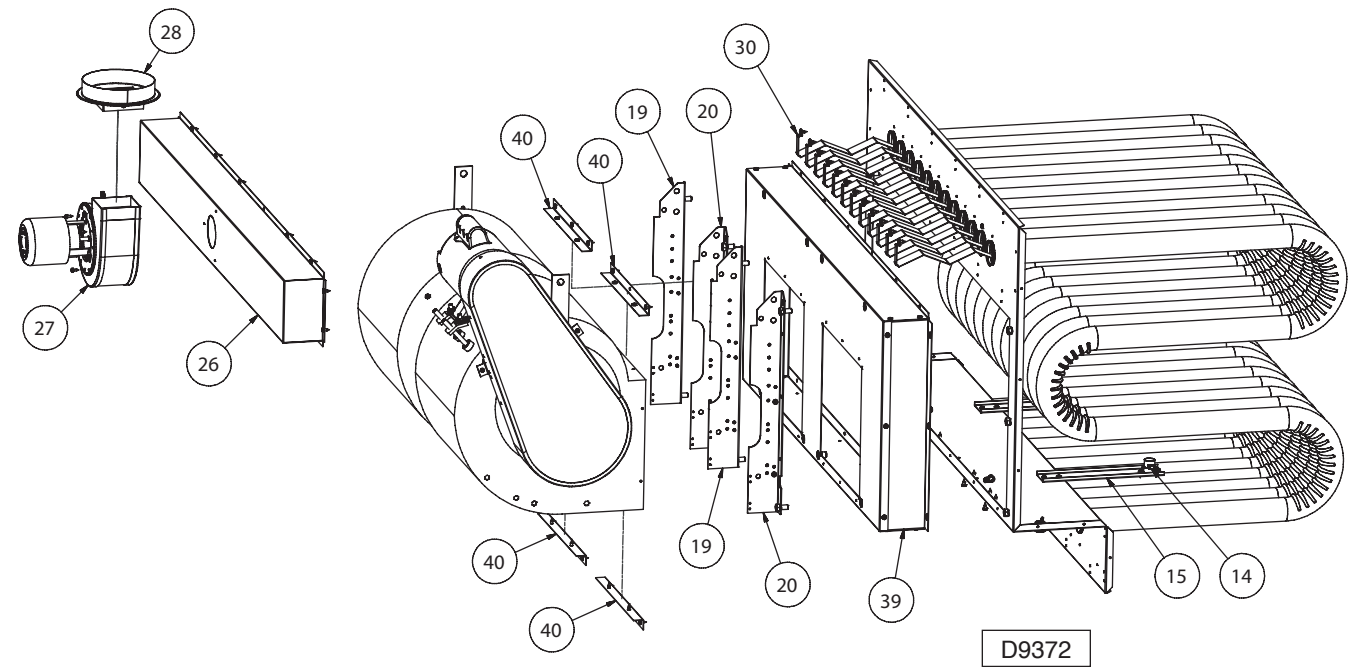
Exploded View - Less Jacketry and Controls, Dual Blower
